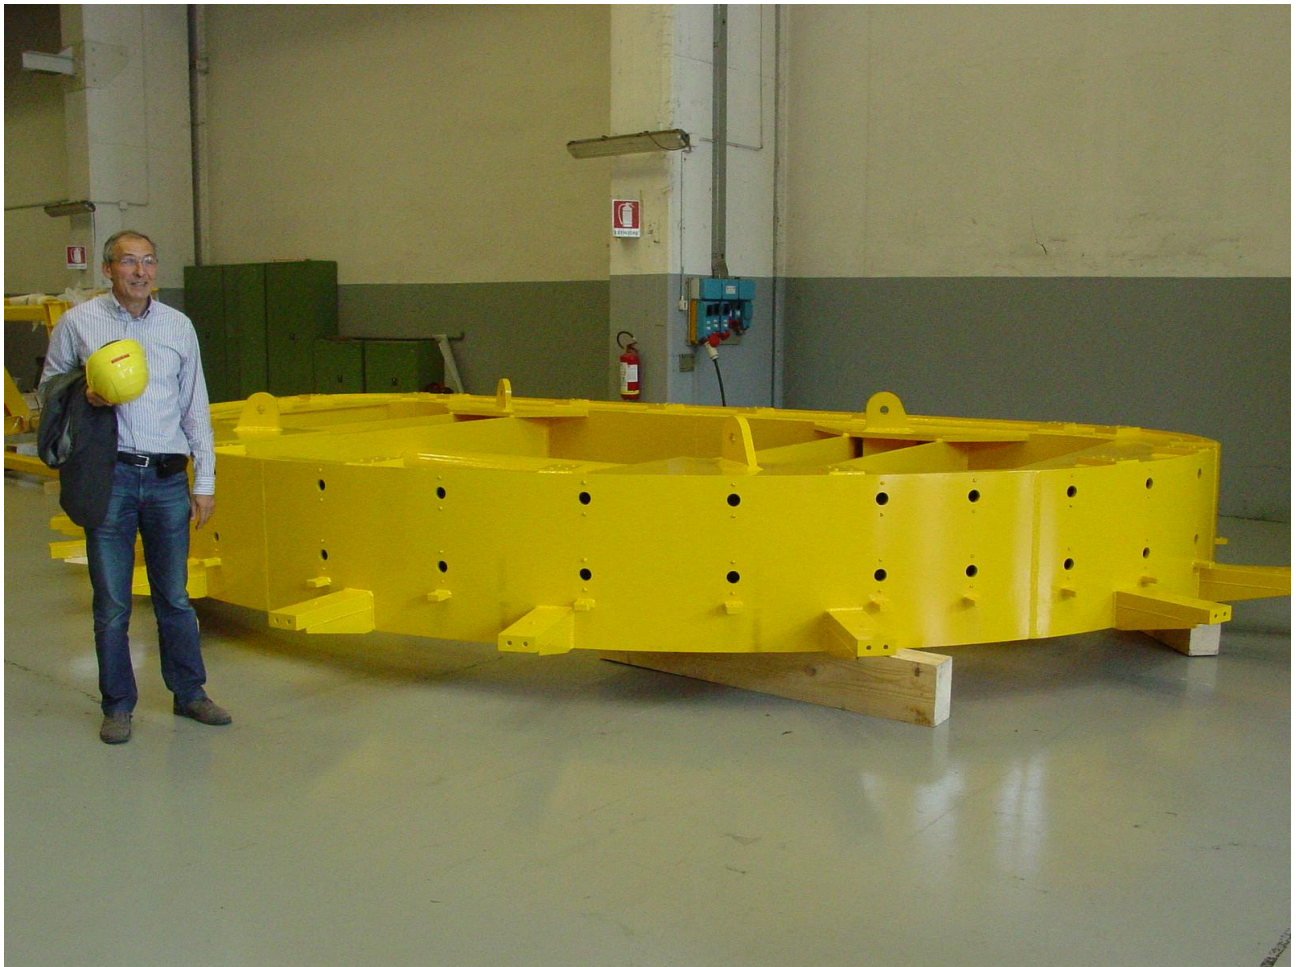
Central core of the WP into casing insertion tooling ready for assembly in ASG workshop.
